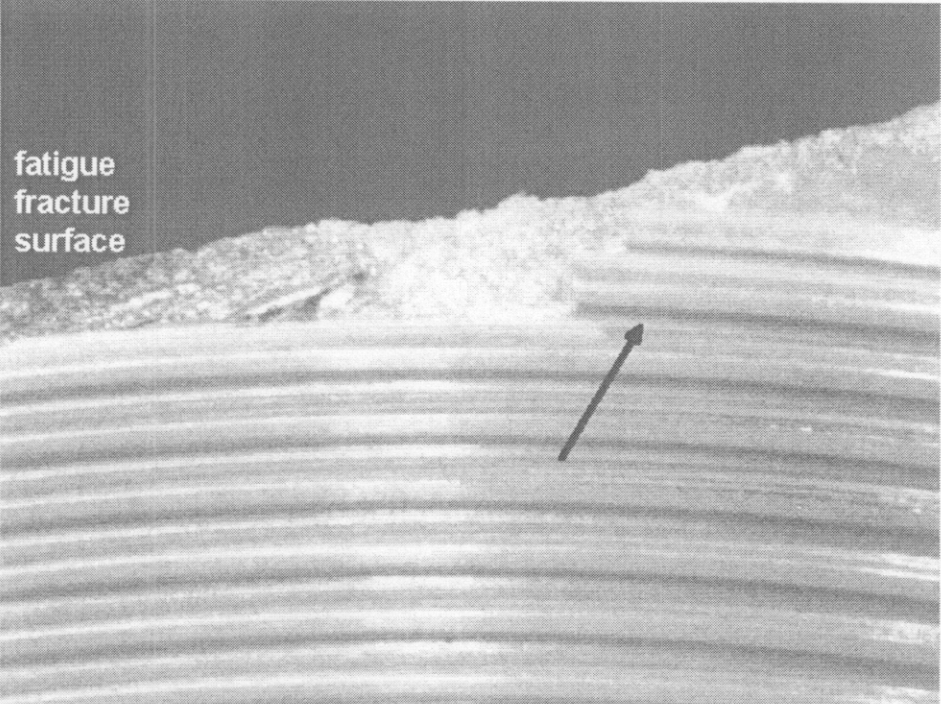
The arrow locates the thread root radius of the first full thread. The fatigue fracture originated at the radius.
